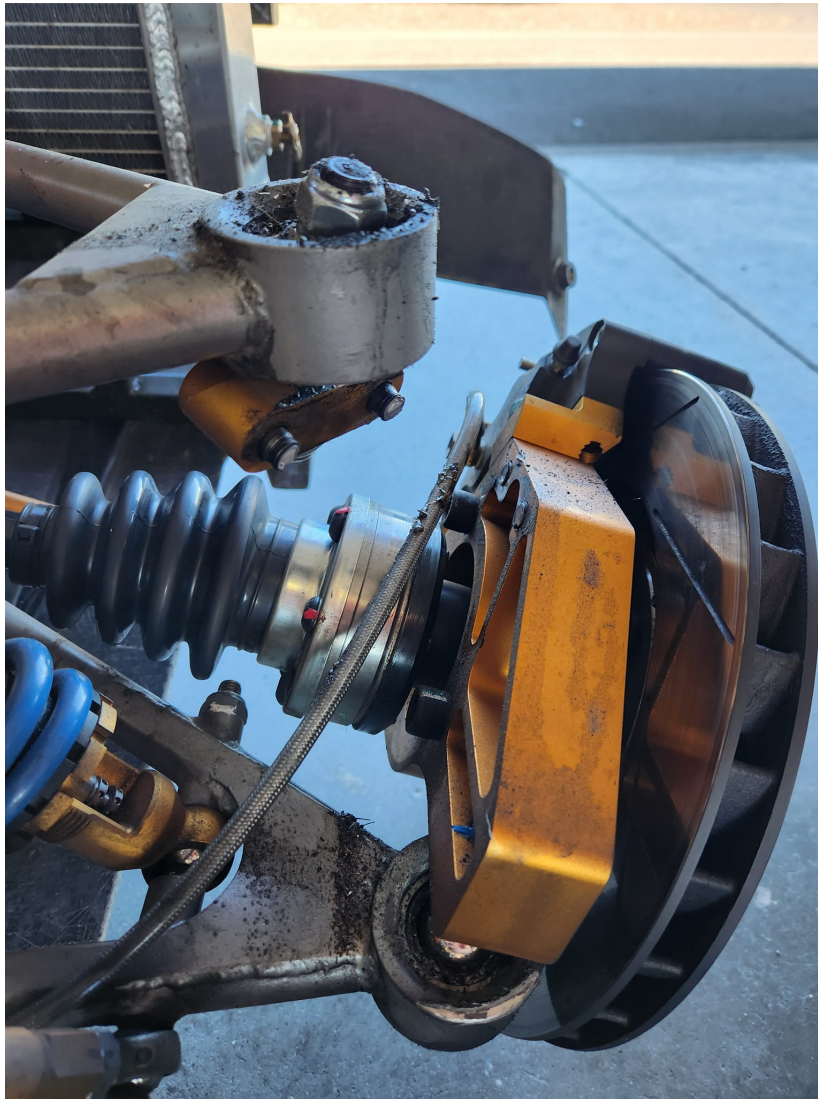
Pictured: broken upright bolts on rear left wheel hub.
